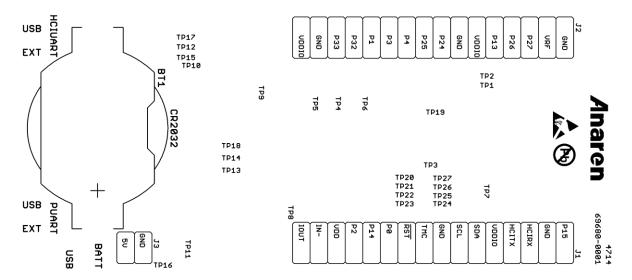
PCB Layout Bottom Silkscreen Mirror Image
